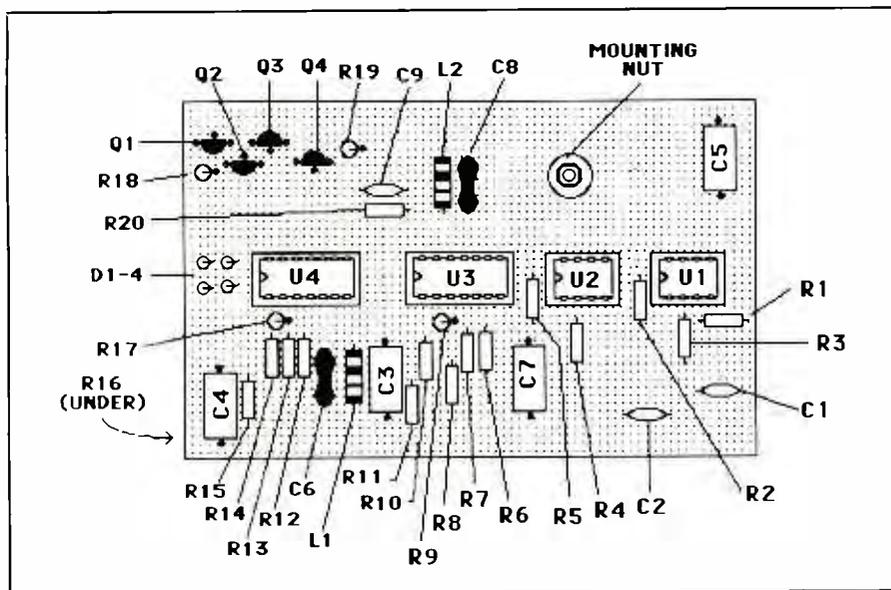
Suggested component layout for main transmitter circuitry on perforated board.
